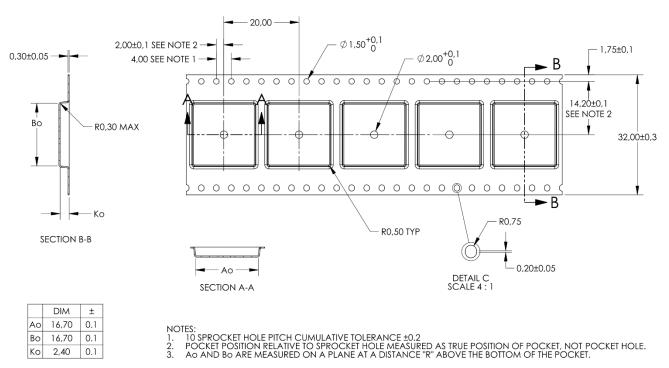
LEXI-R422 modules tape (all dimensions in millimeters)
